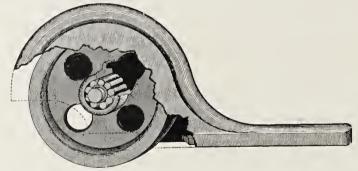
SECTIONAL VIEW OF GRANT OVERHEAD
